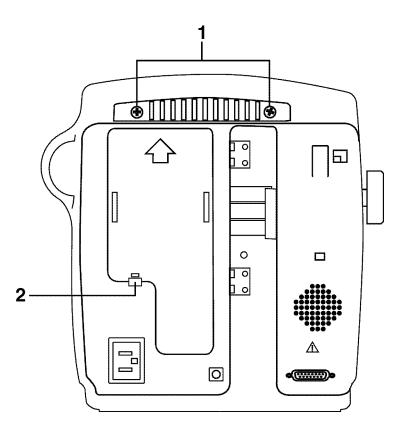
Rear view. To remove the battery compartment cover, depress the latch (2) and push the arrow up. The front and rear case are secured by screws (1) inside the hand recess.
